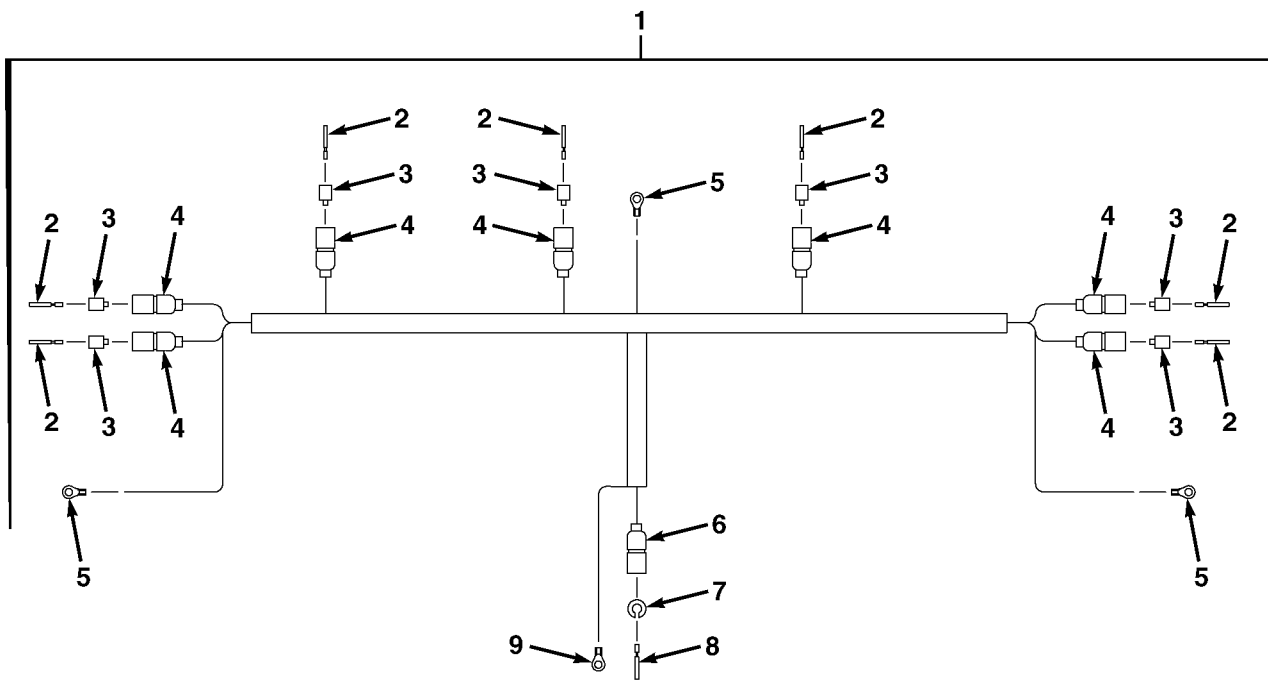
CLEARANCE LIGHT HARNESS, REAR
